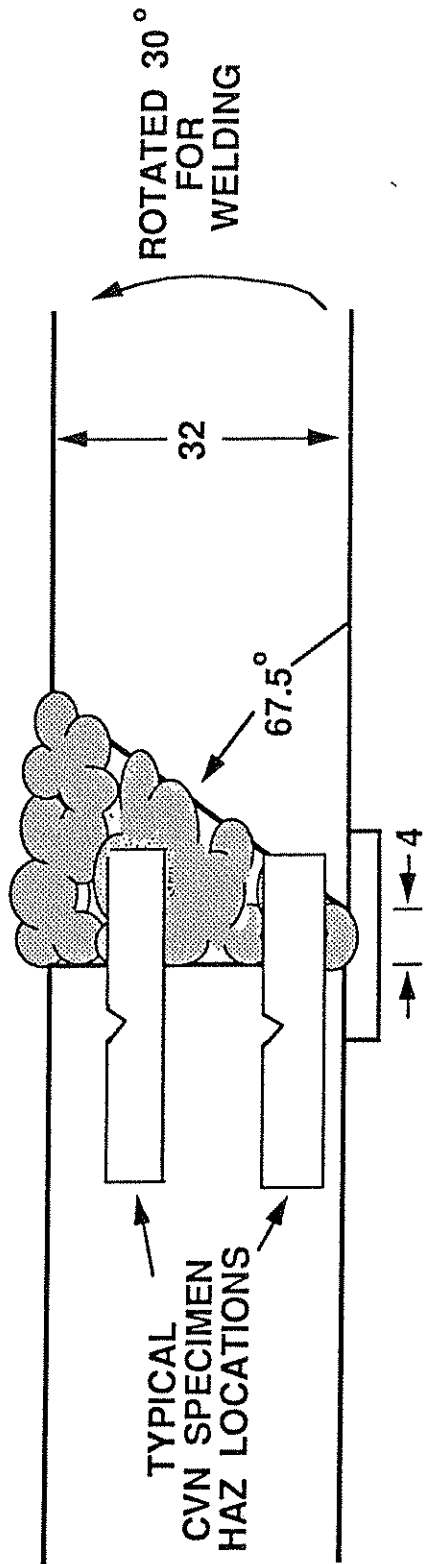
Weldment Configuration and Specimen Location for the Heat Affected Zone Study.
